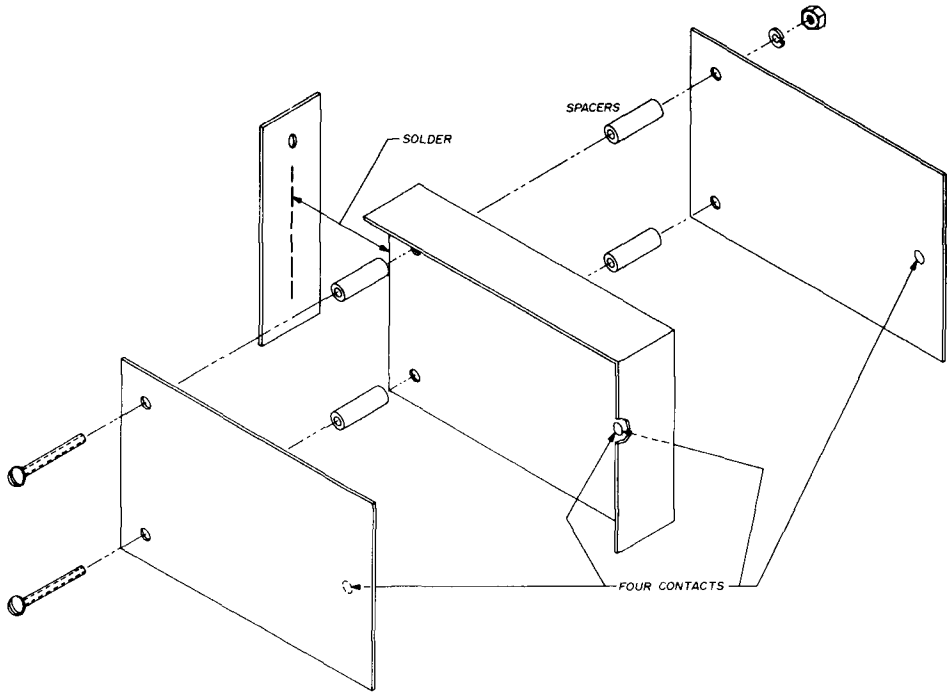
Squeeze paddle details. The middle double-sided PC board carries the stationary contacts. Single-sided PC board is used for the dot and dash paddles.
